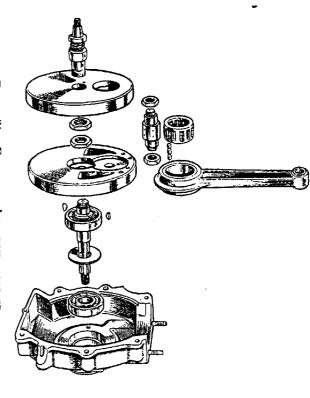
(b).—FLYWHEEL ASSEMBLY—1955-57.
